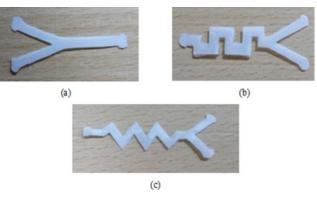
Mold preparation with PET [a] Y Shape, [b] Serpentine shape [c] Zig-Zag Shape.
